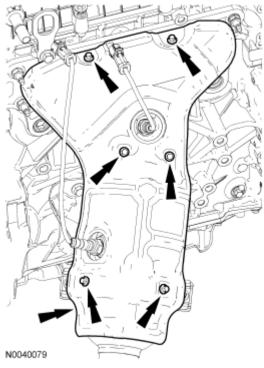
Locating Heat Shield Screws Courtesy of FORD MOTOR CO.
